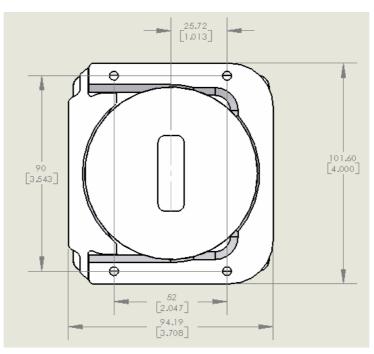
Enclosed Body (Type D) with Split Flange (Type C) – Front View
